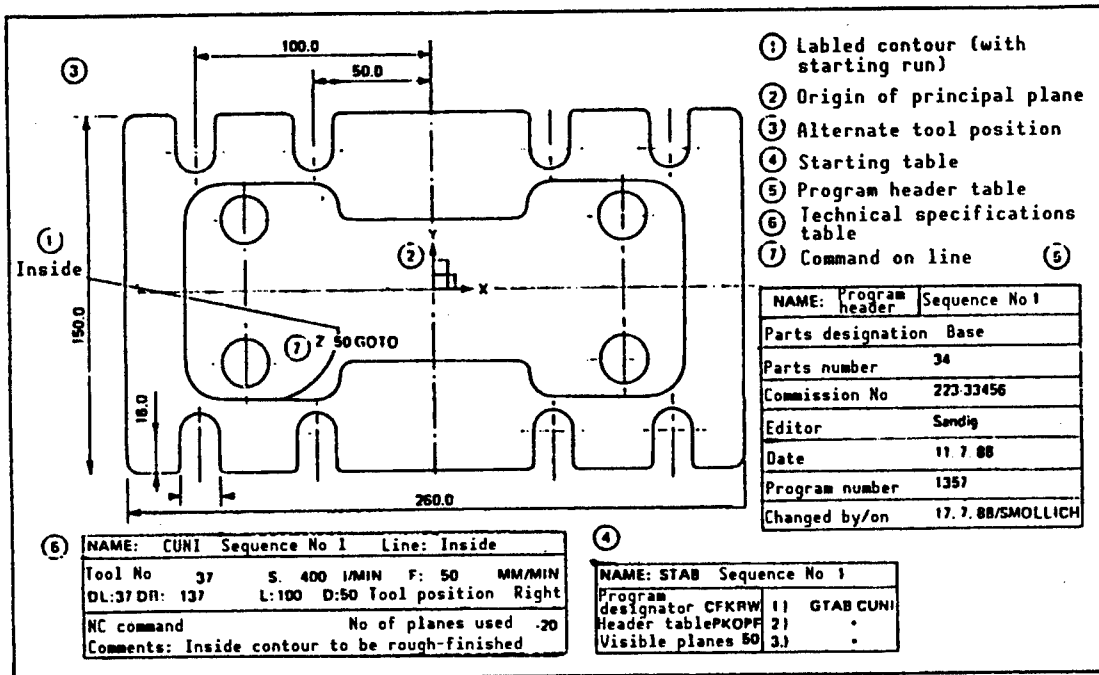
Production technology design drawings for ISO module 2-1/2D milling)
